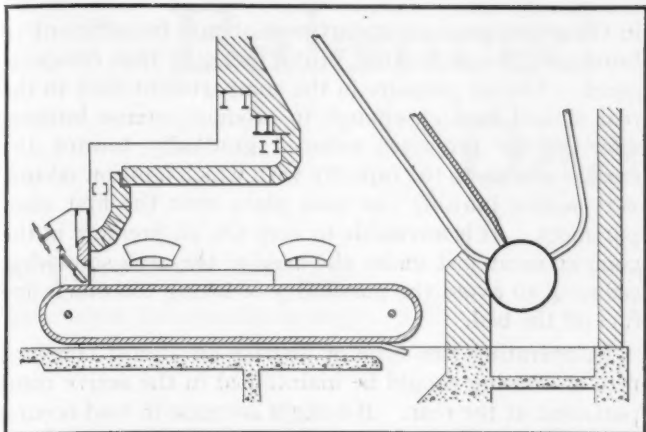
Front arch furnace for burning buckwheat or coke breeze
